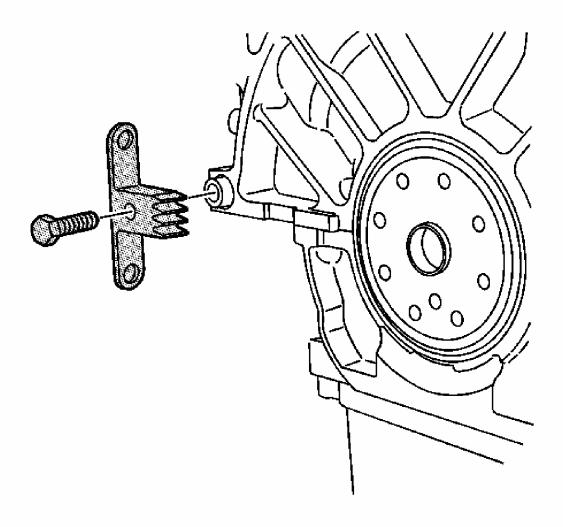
View Of J 44214 & Engine Block Courtesy of GENERAL MOTORS CORP.
